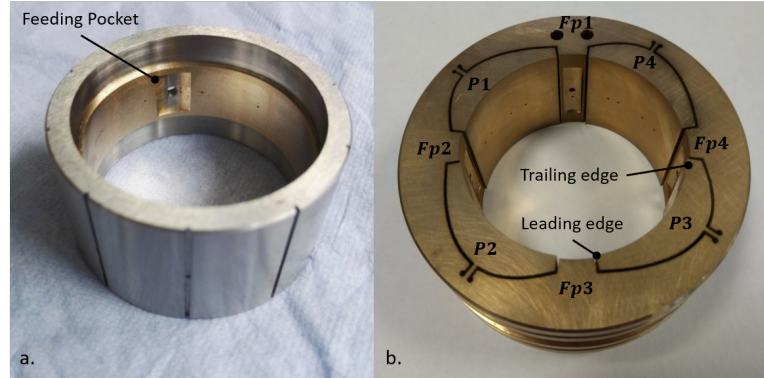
Studied bearings. a. Cylindrical journal bearing. b. Tilting pad journal bearing.
